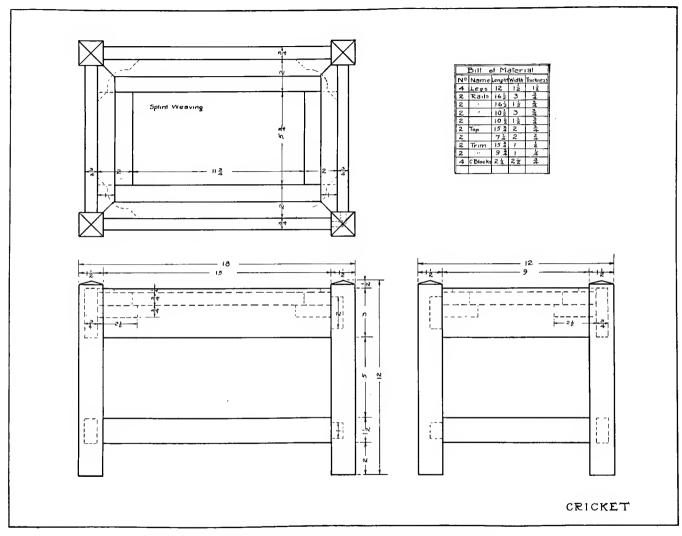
Working Drawing of Foot Stool (Eighth Grade)
